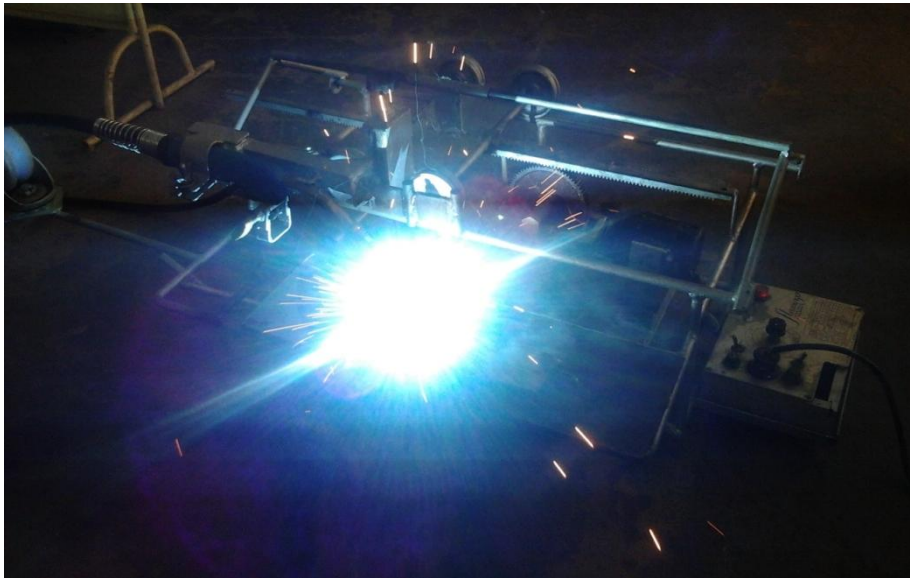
Welding of specimens on automatic GMAW setup
